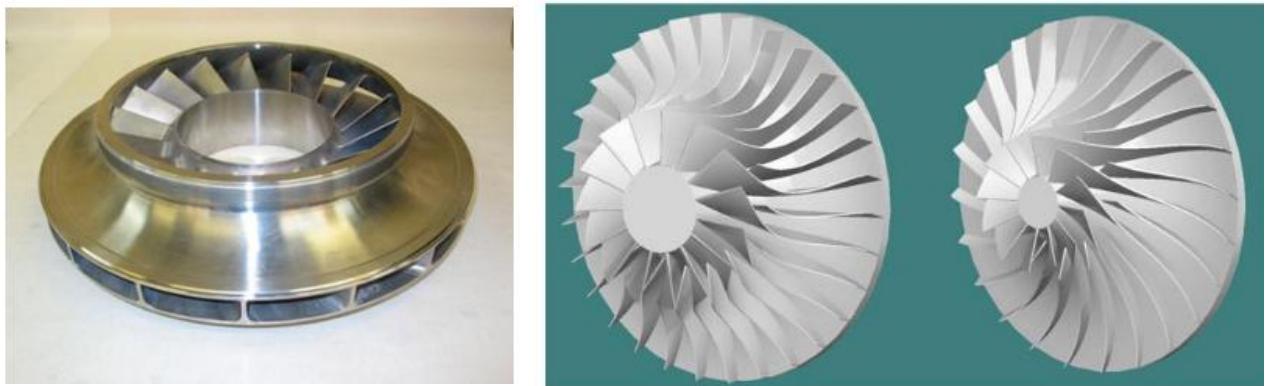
Examples of impellers of centrifugal compressor (left shredded, right open-faced) [57,59]
